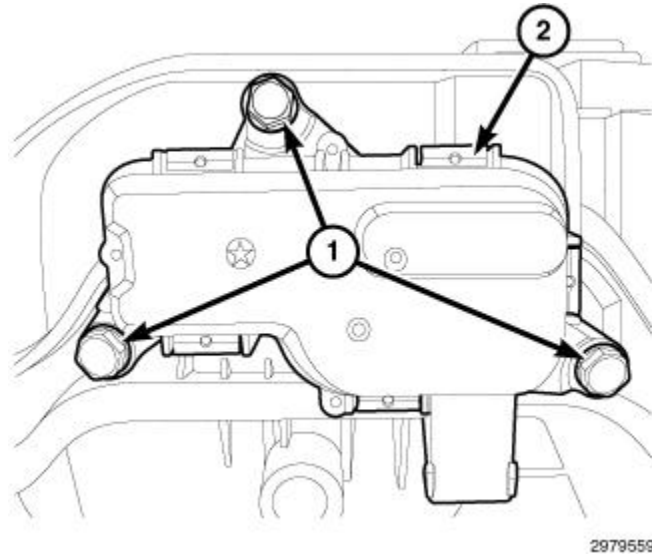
Short Runner Valve (SRV) Actuator Retaining Bolts & SRV Actuator
